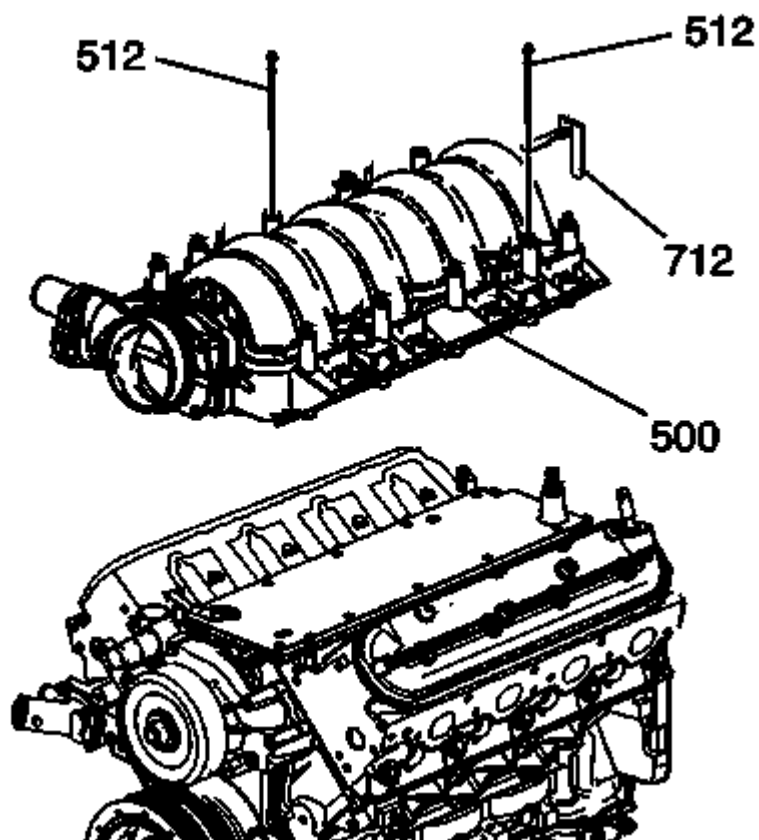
Intake Manifold, Bolts & Fuel Rail Stop Bracket
